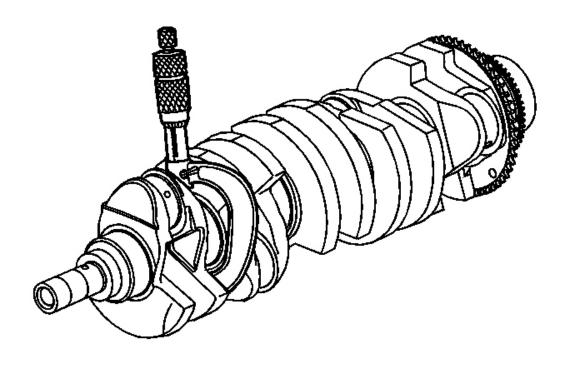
Measuring Crankshaft Bearing Journal Courtesy of GENERAL MOTORS CORP.
